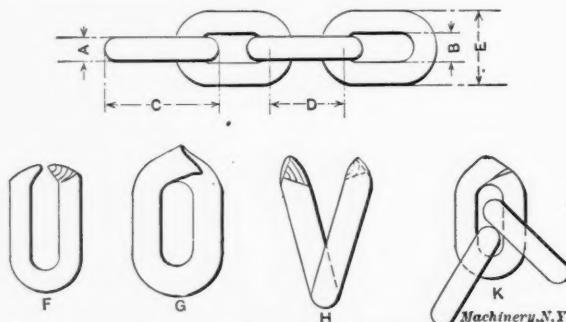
Notation for Chain Dimensions, and Successive Stages in the Welding of a Chain Link connecting Two Pieces of Chain.
